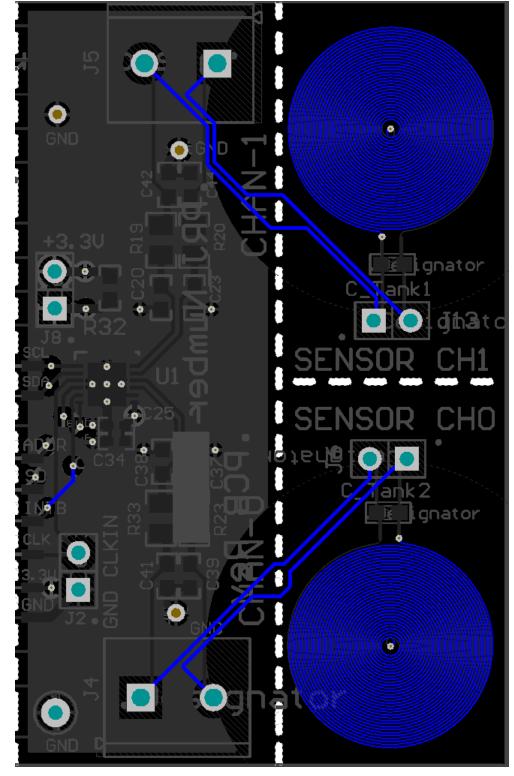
Example PCB Layout: Bottom Layer (Signal)
